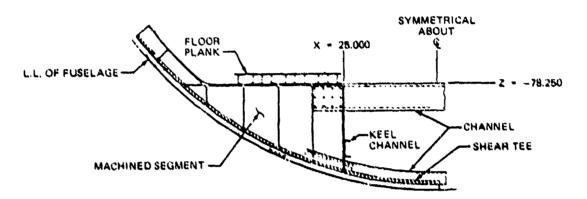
TYPICAL EXTRUDED FLOOR PLANK
